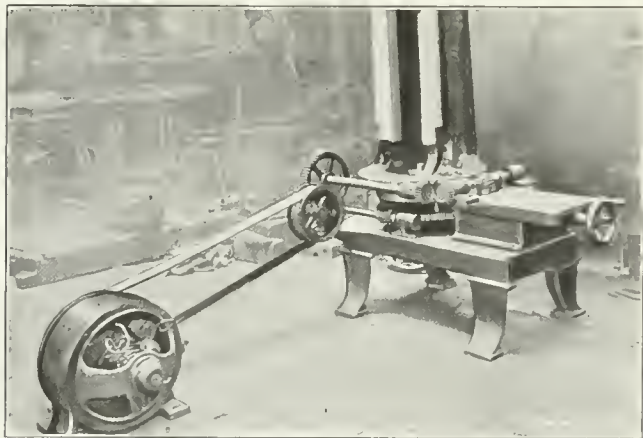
Complete Machine for Hobbing Worm Gears on Radial Arms
